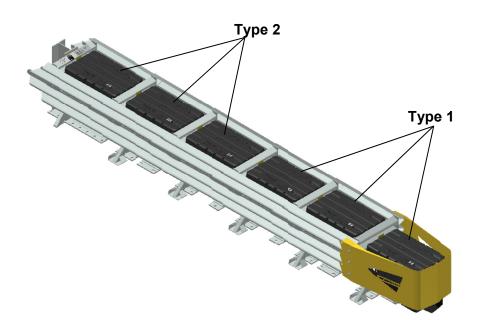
Typical Cartridge Layout 5 Bay System Shown
